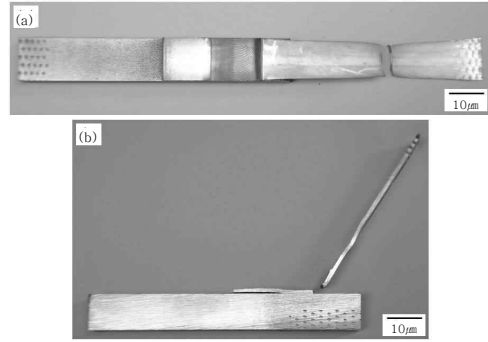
Top views of (a) tensile and (b) peel tested specimens
